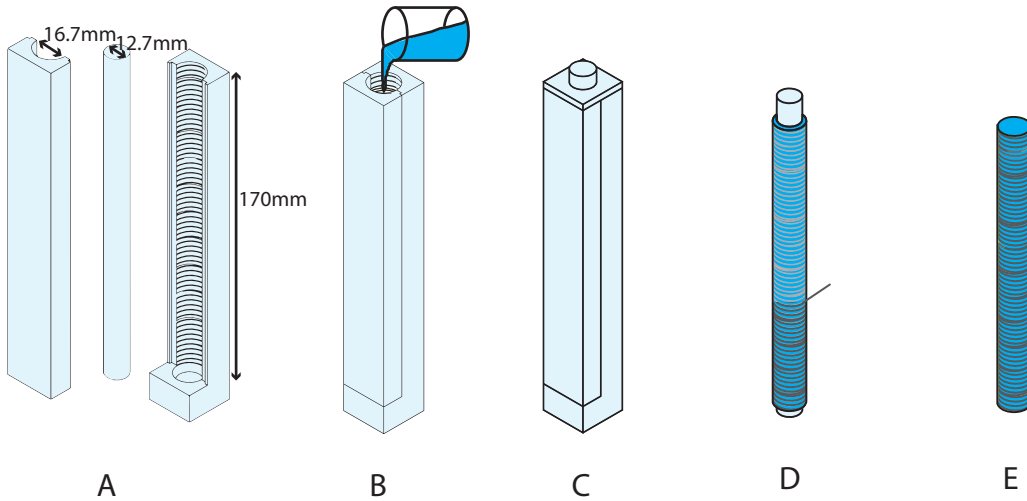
Fabrication of an extending/expanding/twisting actuator. (A) A metal rod and 3d printed mold are used to mold the elastomer. (B) Elastomer is poured into the mold. (C) The rod is inserted into the mold and held in place with a 3d printed cap. (D) The mold is removed and Kevlar fiber is wound around the outside of the actuator. (E) The actuator is capped with Sil-Poxy.
